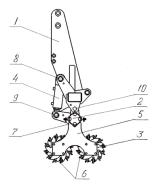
Scheme of double roll crusher of plant residues (side view): 1 – frame; 2 – subframe; 3 – drums; 4 – hydraulic cylinders; 5 – brackets; 6 – cutting knives; 7 – flanges; 8, 9, 10 – fingers
